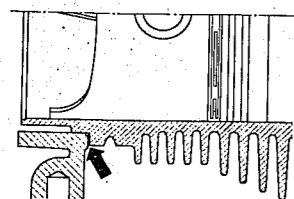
Location of the paper gasket between the cylinder and cylinder head. Fit before sliding the head over the piston.
